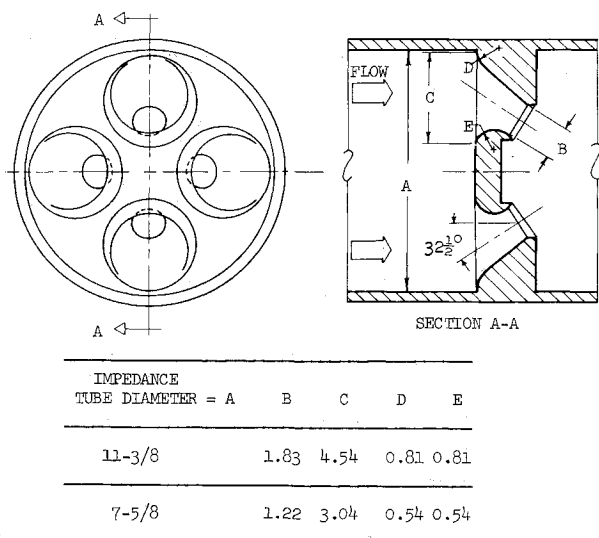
Multiple-ported solid rocket nozzle. (All dimensions in inches.)
